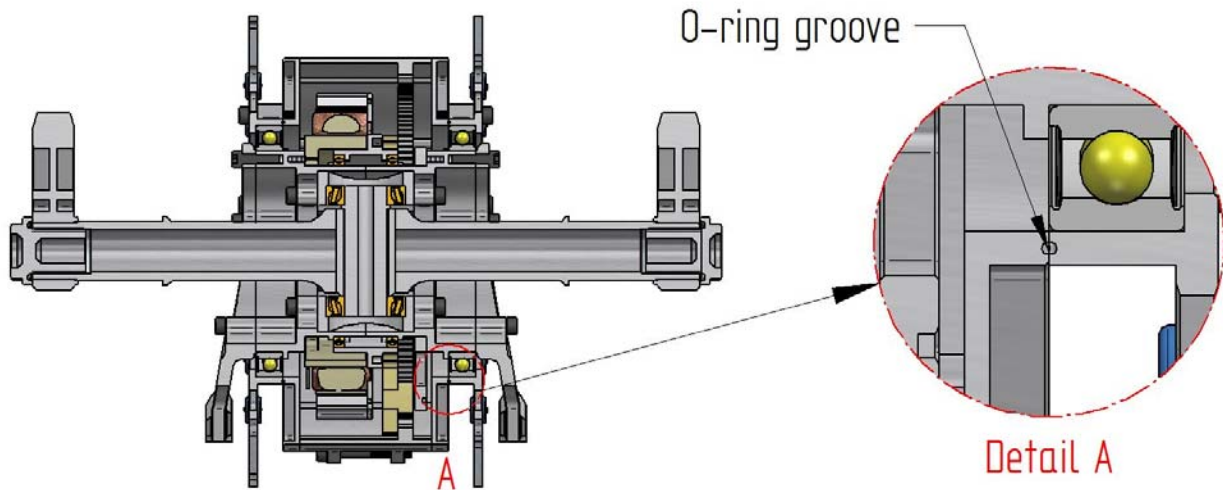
O-ring seal groove, one on each side of the motor cover.
